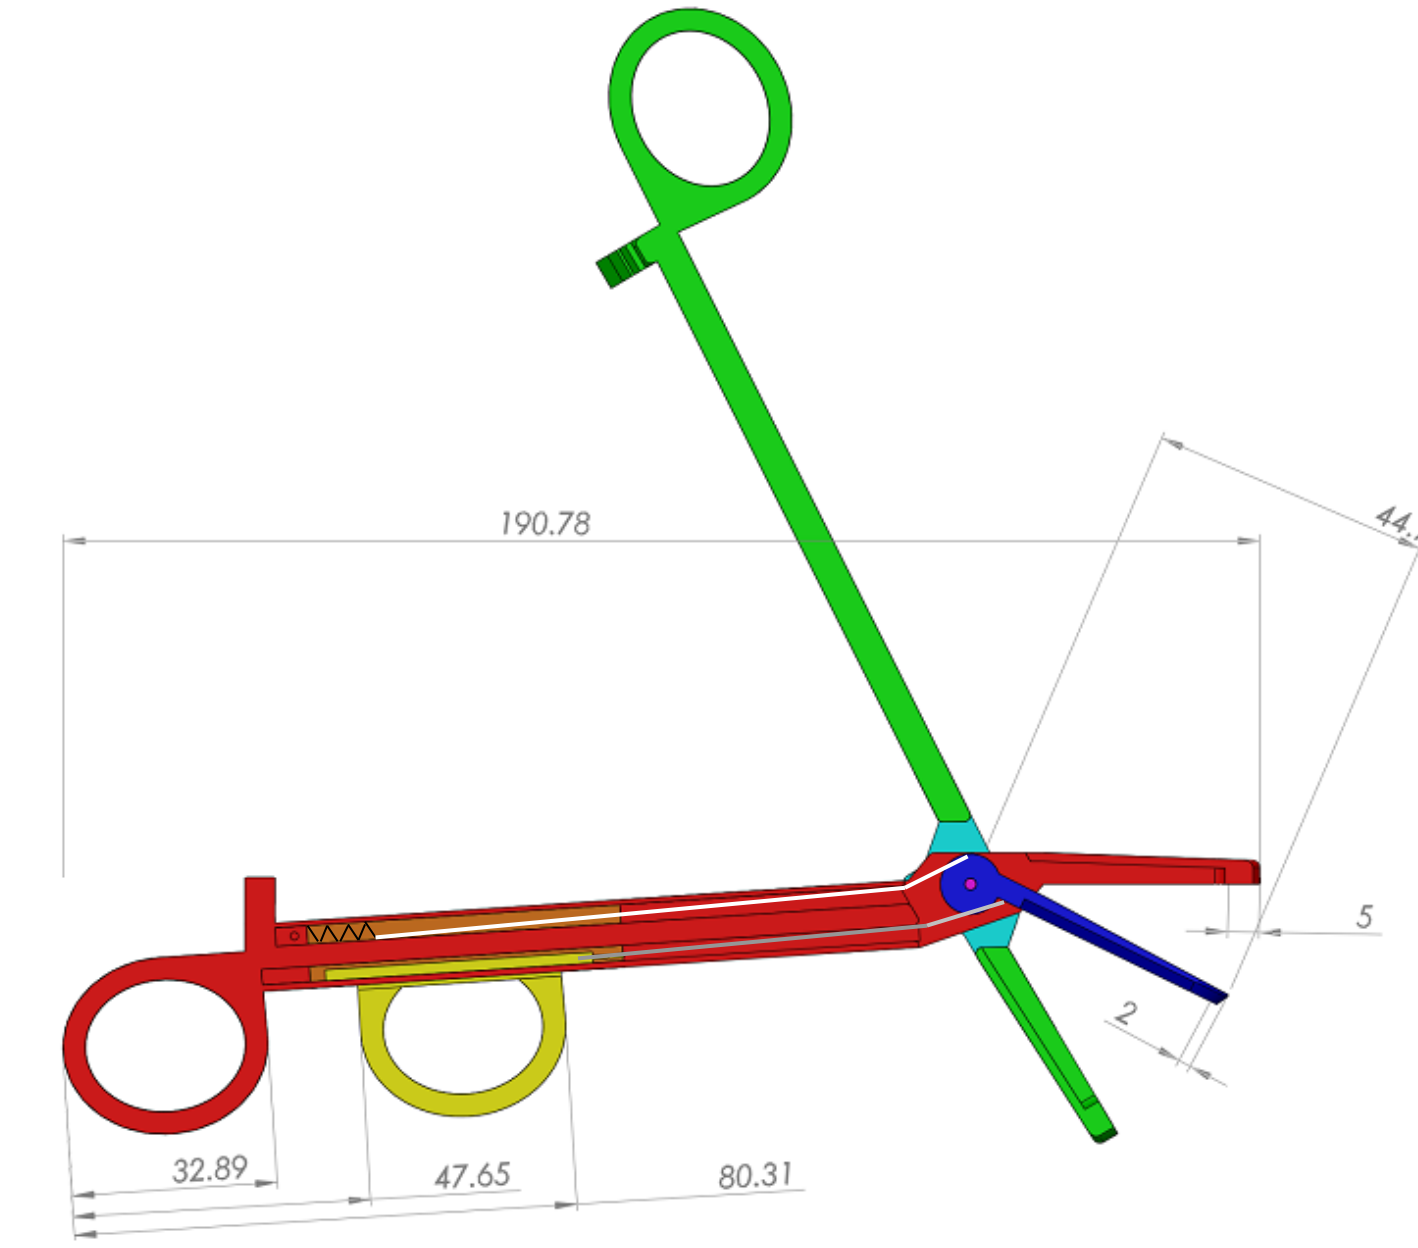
Bottom view of the prototype with top sectioned plane through the device. The assembled parts, spring, and wire are clearly seen. All dimensions are in mm.
